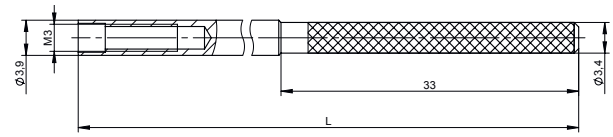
Extraction tool Type 1349 for dummy sensor Type 6405A3
